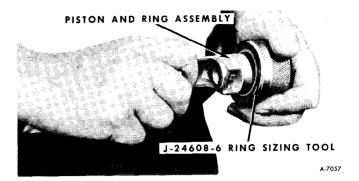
Turning Piston and Ring Assembly into Sizing Tool
